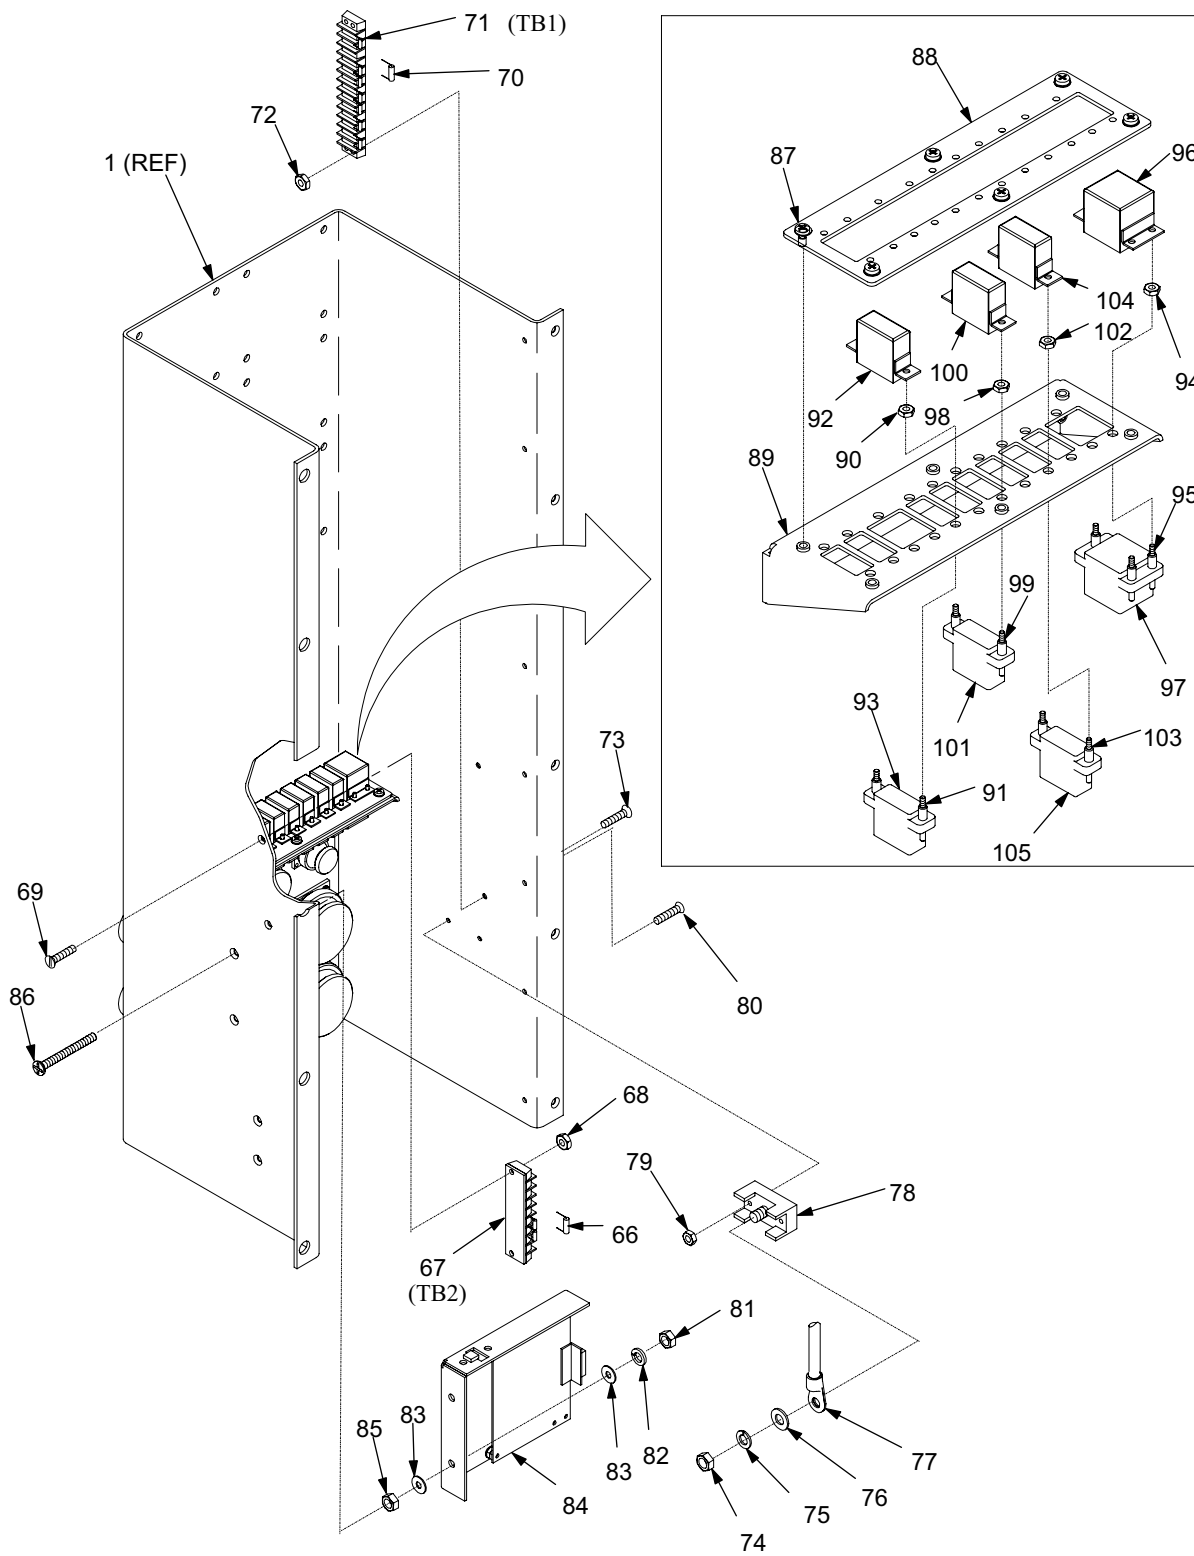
Pan Assembly Replacement (Sheet 2 of 6)
